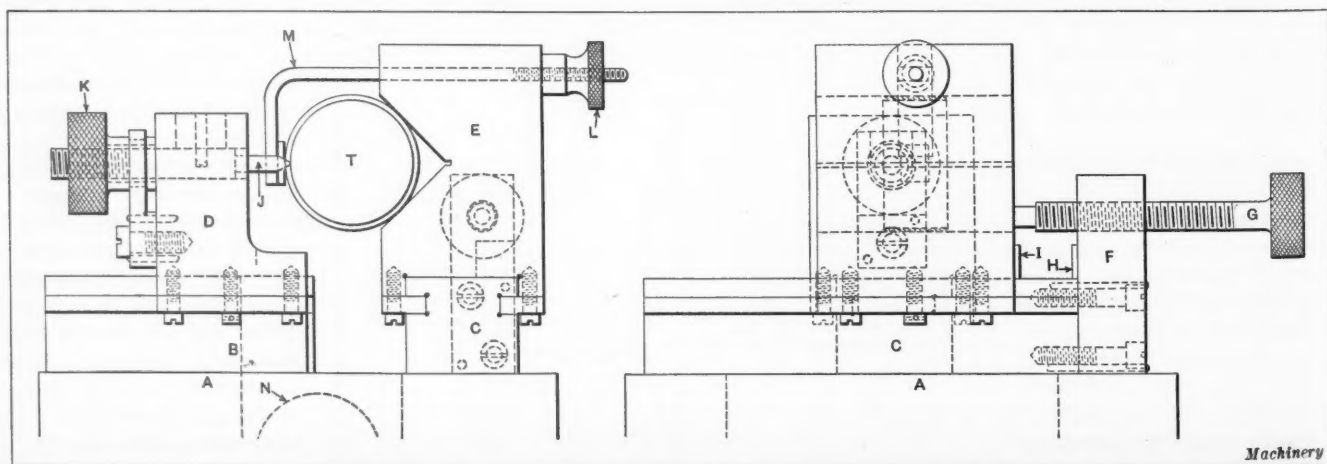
Gaging Fixture for testing Lead and Angularity of Gage Thread
